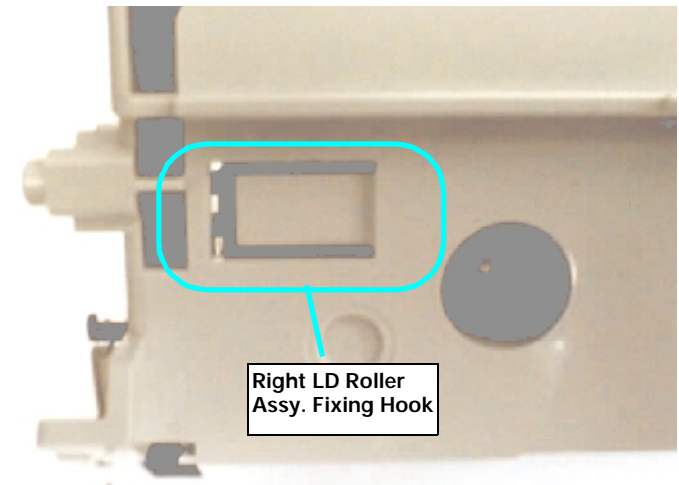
Right LD Roller Assembly Fixing Hook Position
